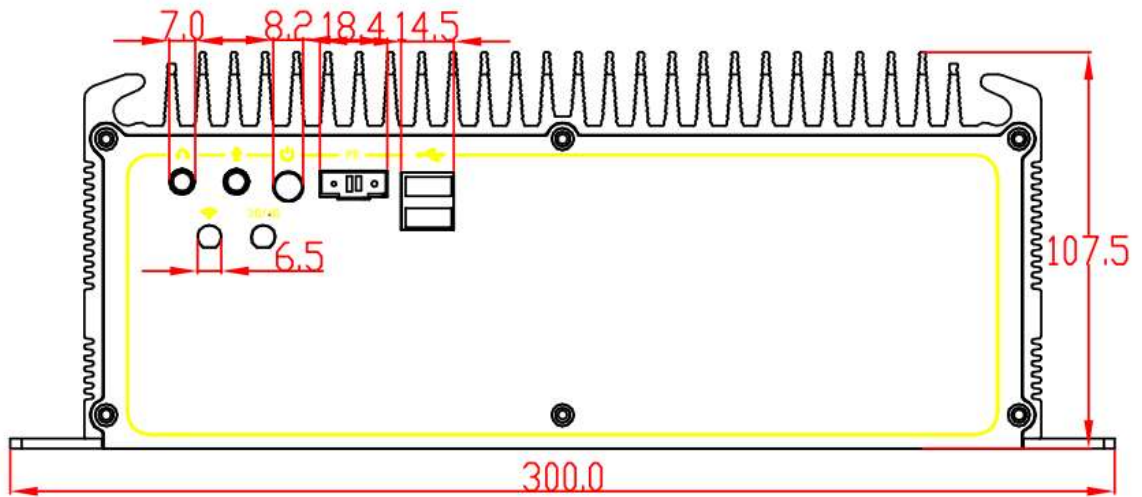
NIS-B988 Front cover mechanical dimension drawing
